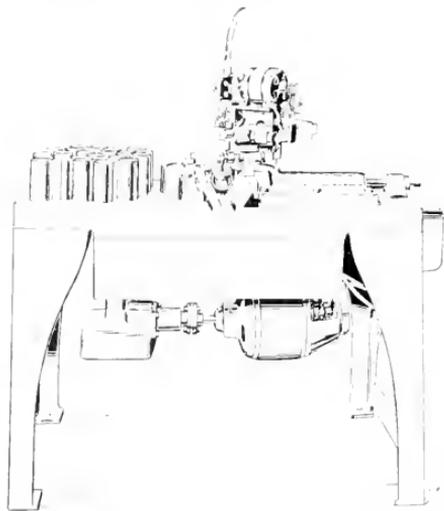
Travel Mechanism for Welding Tubing
